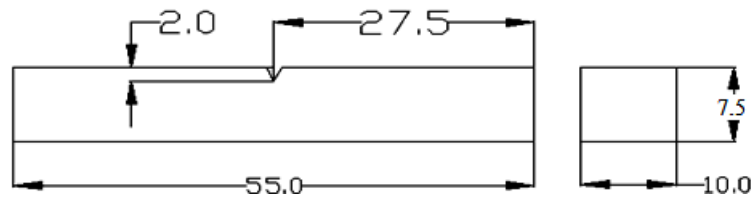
Charpy impact test specimen (IS:1757-1988)
